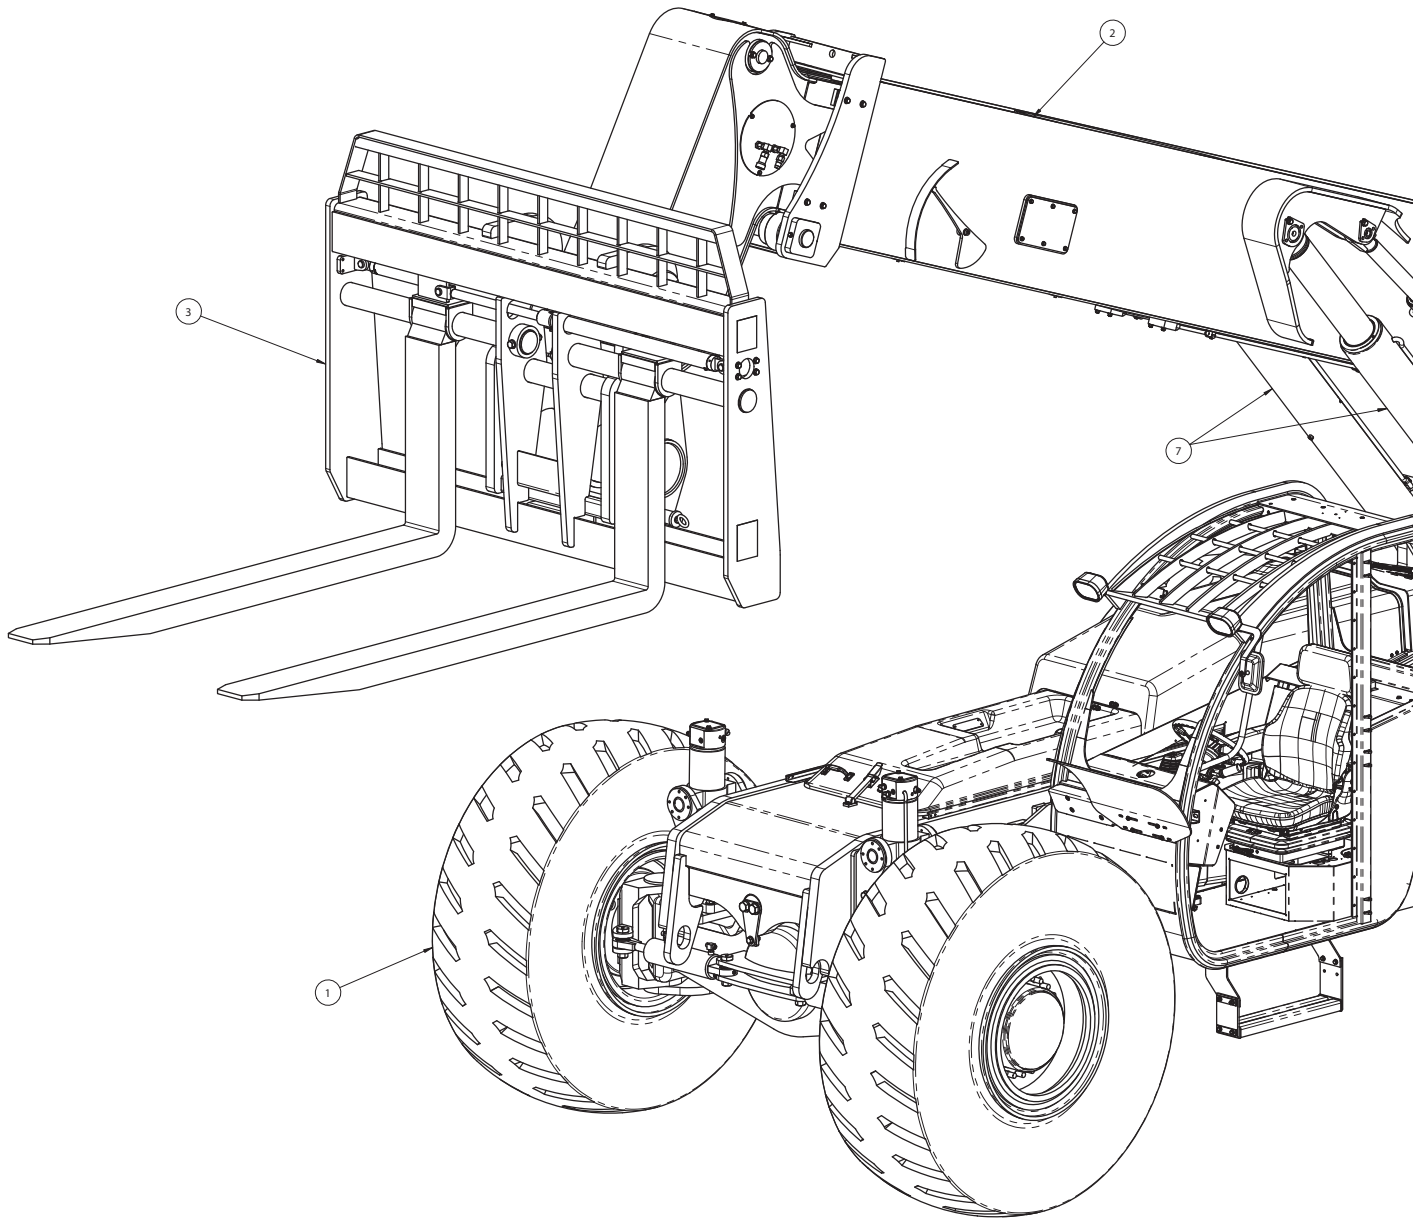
FINAL ASSEMBLY (32000-000)
